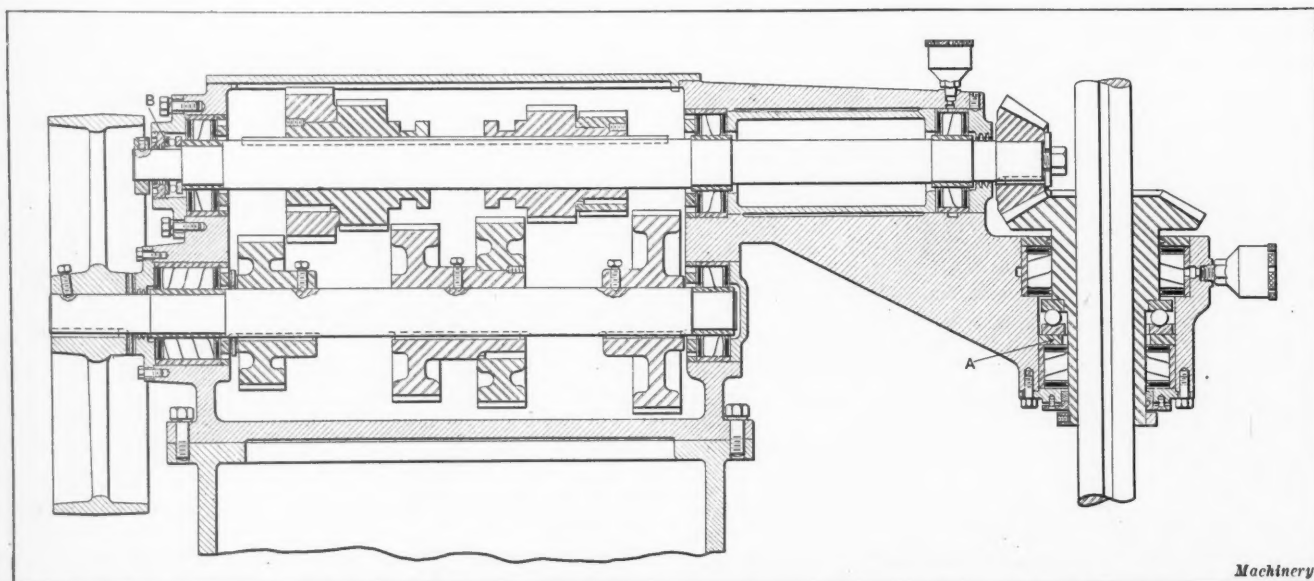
Application of Roller Bearings for carrying Shafts in Drilling Machine Speed-change Gear-box. Note Application of Ball Thrust Bearings to carry Thrust of Bevel Crown Gears. Gear-box Bearings have Inner Races
